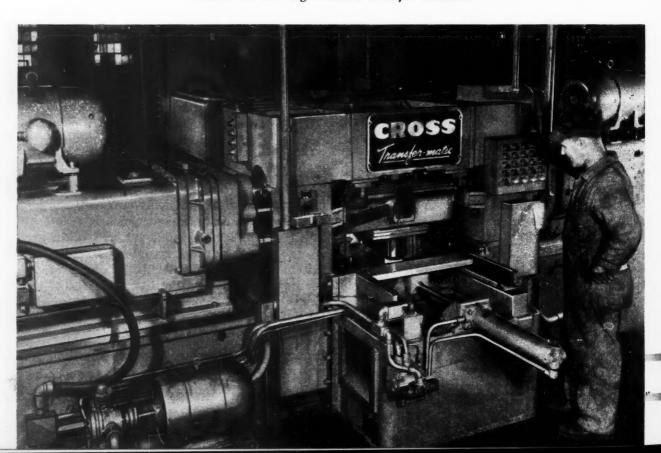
A duplex head, seen at the left, mills mounting pads on the cylinder block, while a gang cutter set-up on the trunnion type milling unit at the right machines a lock notch in each of the main bearings
